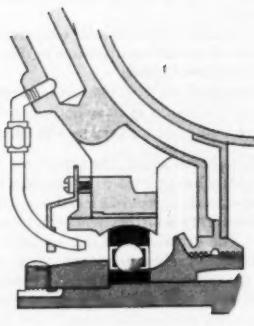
AIRCRAFT GAS-TURBINE BEARING—SOLID-OIL-JET-LUBRICATED
